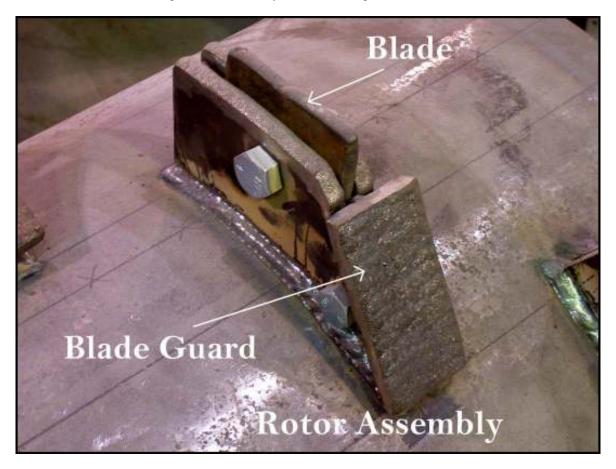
Shredder Rotor Assembly Showing Blade and Blade Guard Position
